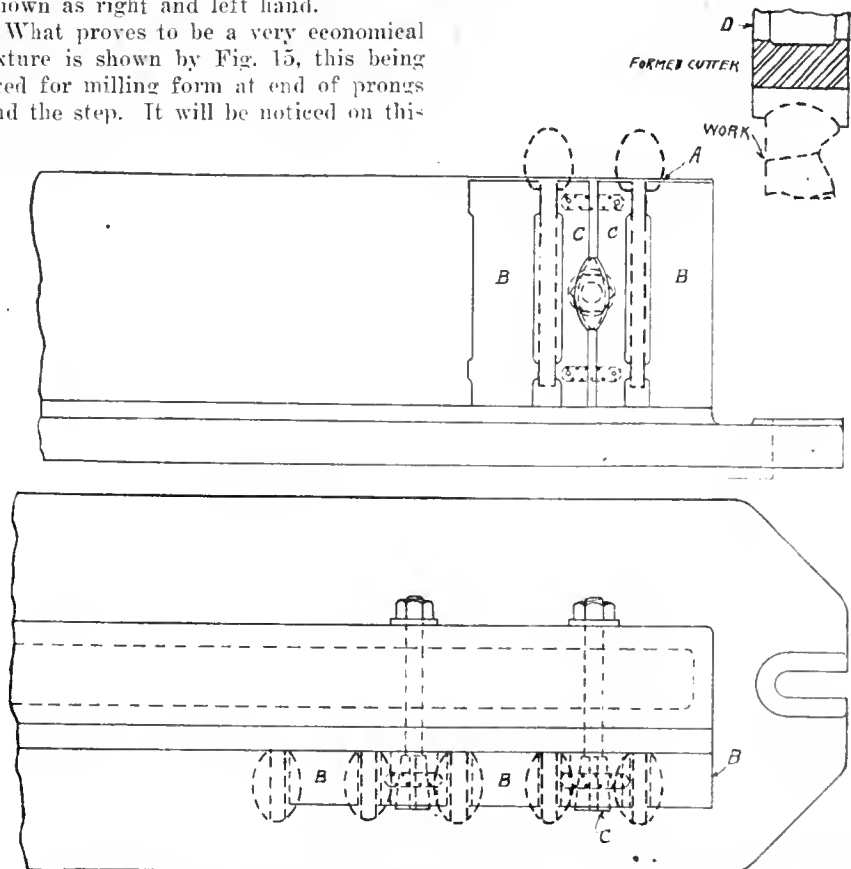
MILLING ENDS OF HILT IN GANG FIXTURE
